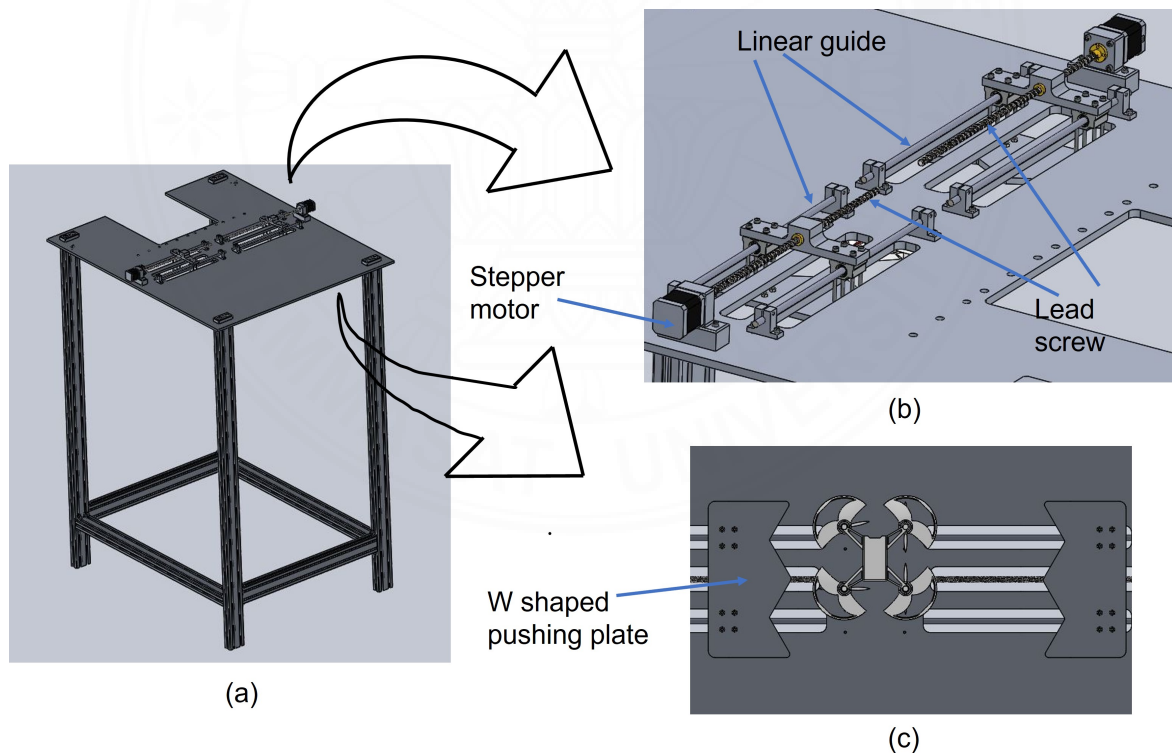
CAD model of the landing platform and the positioning mechanism (a) Whole model (b) Top view (c) Bottom view
